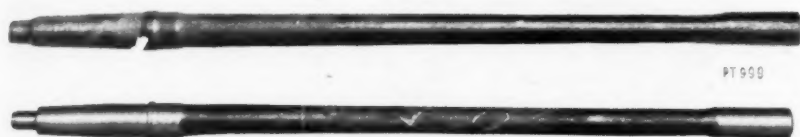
Above, a rough axle shaft forging as it comes to the Sundstrand Model 10 Automatic Stub Lathe. Below it, a similar part after turning both ends simultaneously.
